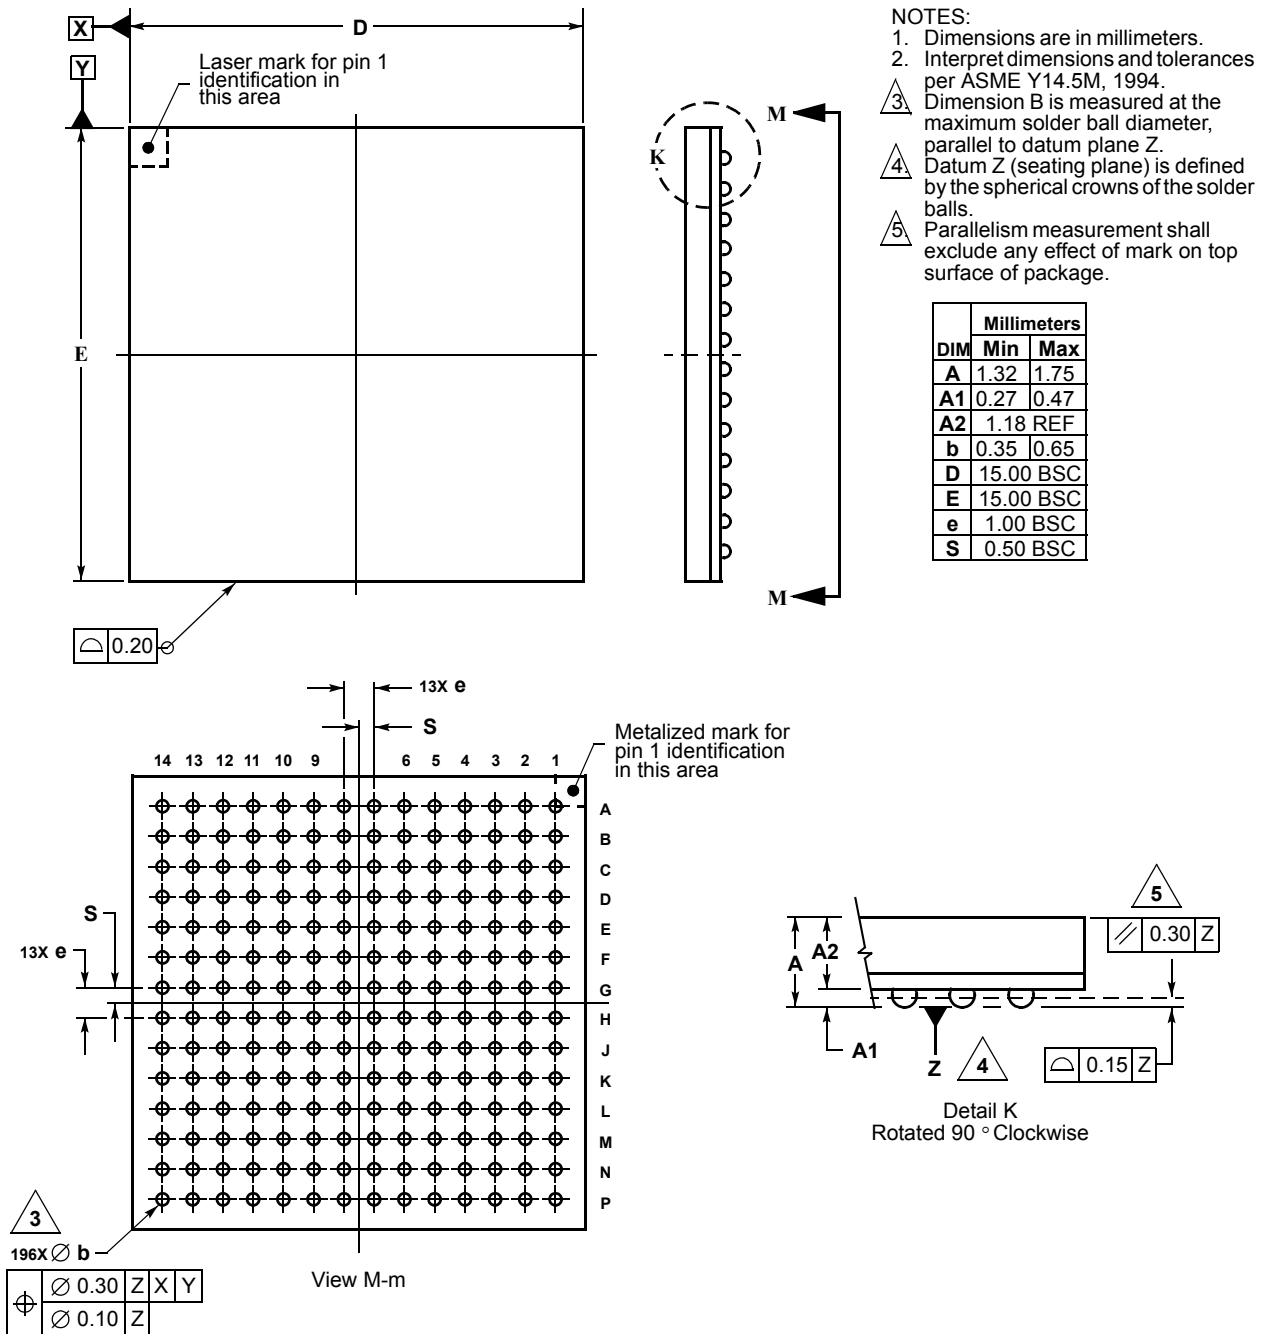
196 MAPBGA Package Dimensions (Case No. 1128A-01)
